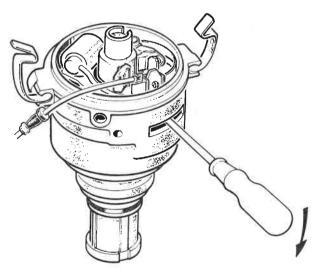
Dismantling procedure : expansionfit type contact-breaker sub-assembly
